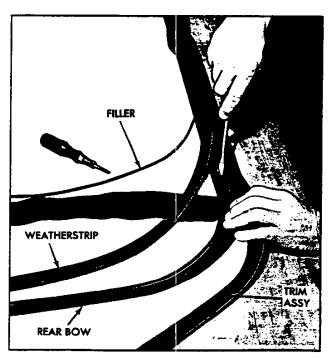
Installing Trim and Weatherstrip to Rear Bow
